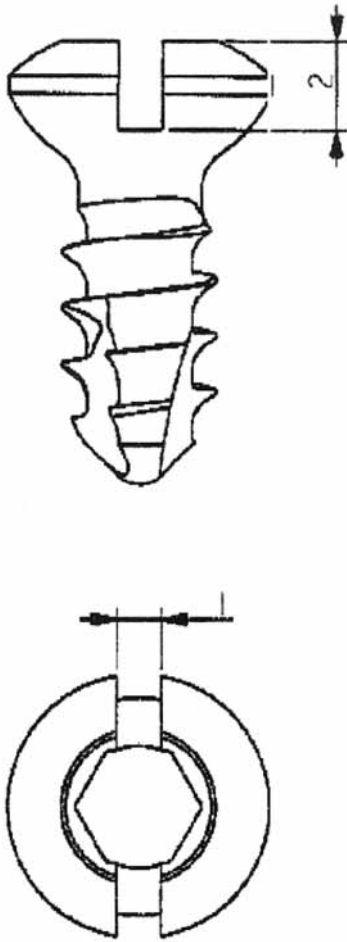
Screw head auxiliary slot dimensions (mm)
